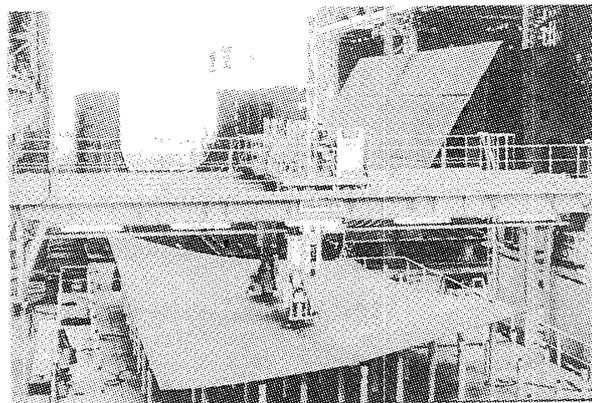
Welding Robot Appearance (Hitachi Zosen Corporation)
